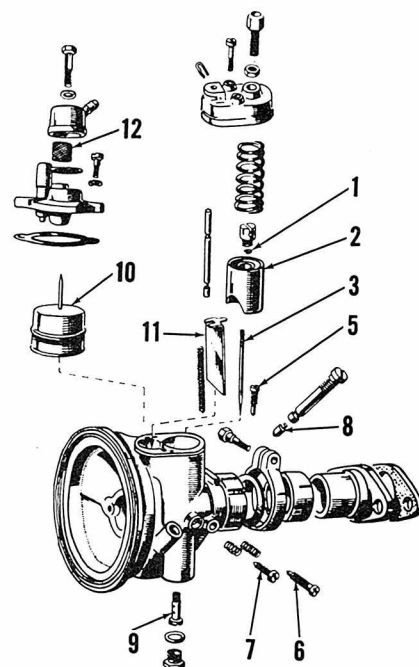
Exploded view of Del'Orto SHA type carburetor used on KL50 models.
